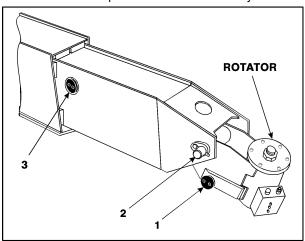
Location of Components - Rotator and Leveling Cylinder
